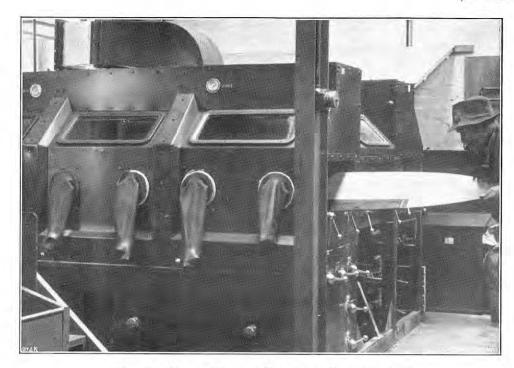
Vapour Blasting Machine in Propeller Shop.
